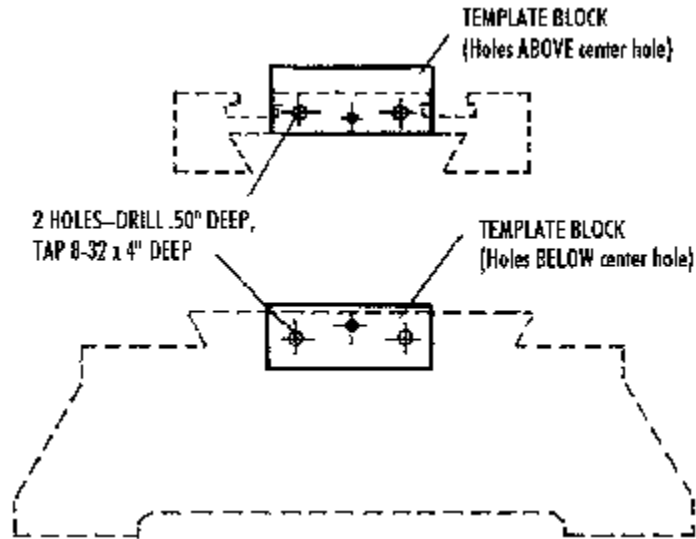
The rectangular block (P/N 67117) is used for the lathe table. The two new drilled holes will be drilled ABOVE the existing center hole as shown in the drawing above. (Lathes made after 2002 will already have these holes in place.)
